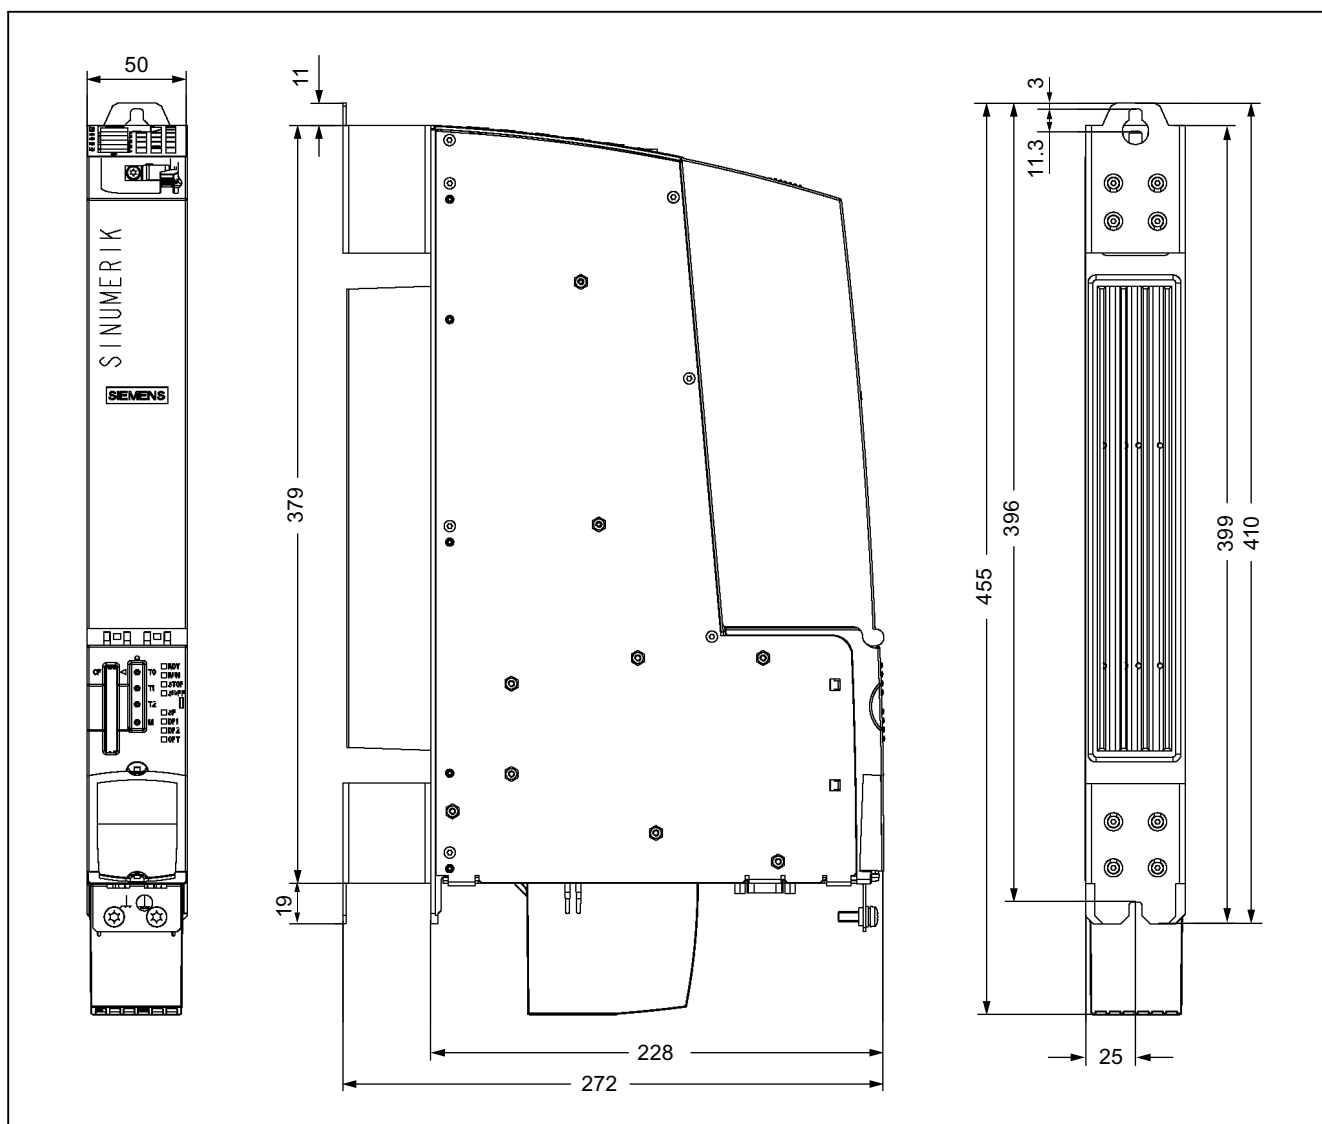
Dimension drawing of Control Unit (dimensions in mm)
